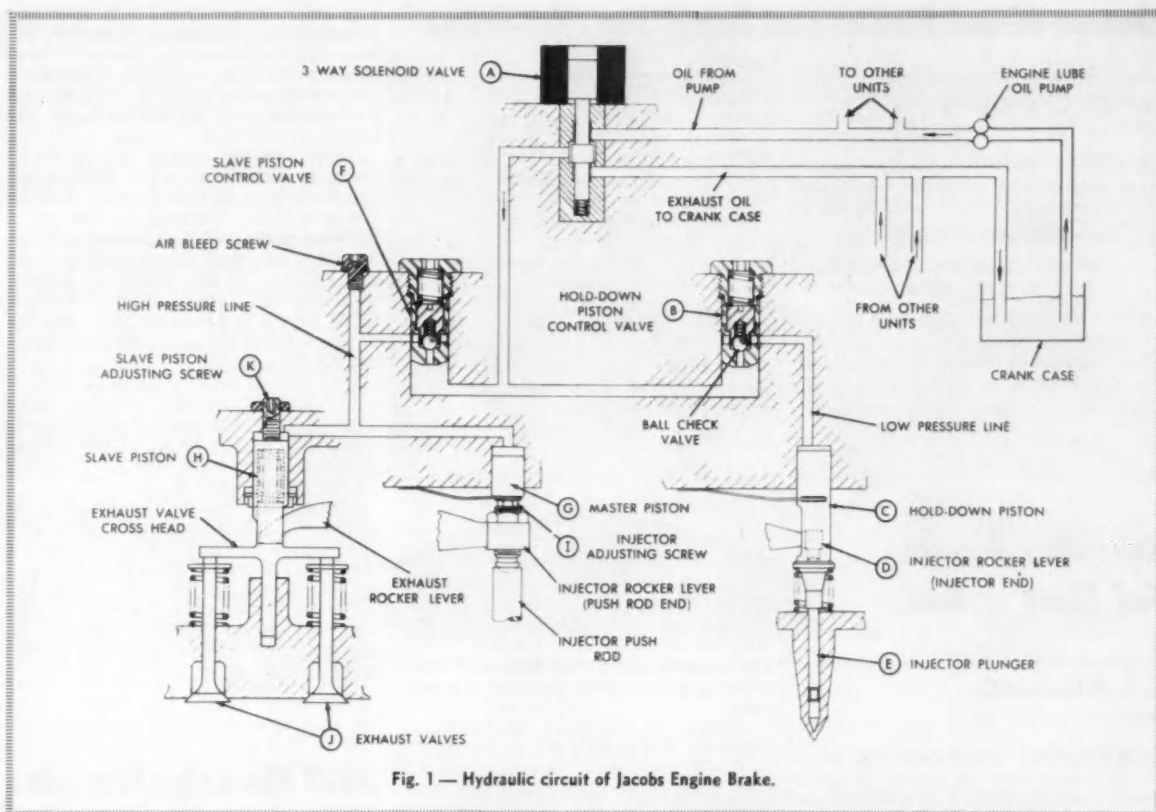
Hydraulic circuit of Jacobs Engine Brake.
